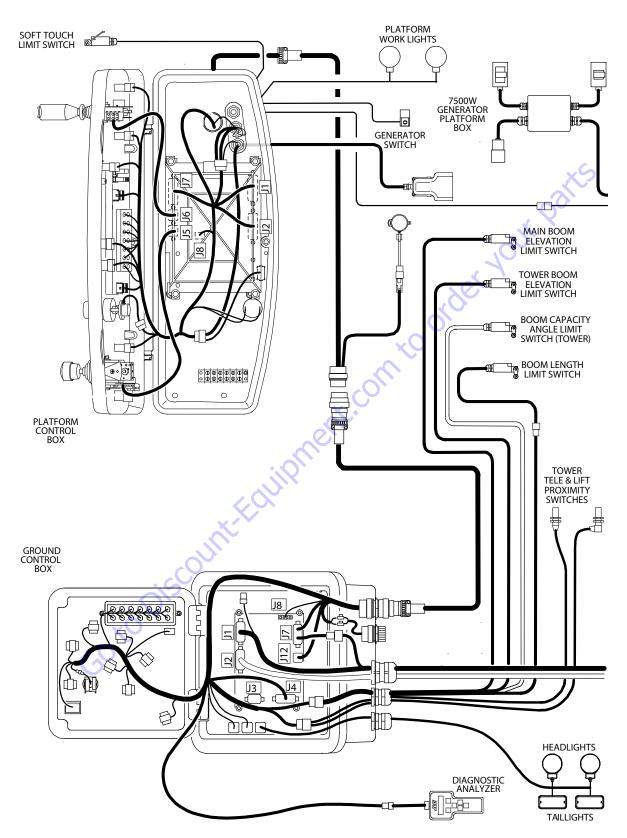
Electrical Components Installation w/ADE (S/N 0300140000 to S/N 0300183033) - Sheet 1 of 2
